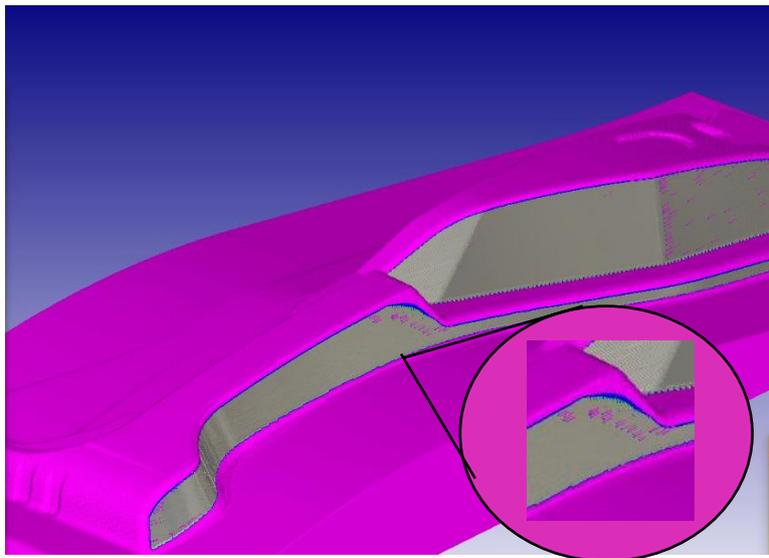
Finishing simulation with a 3-axes conical barrel cutter CNC machine.
